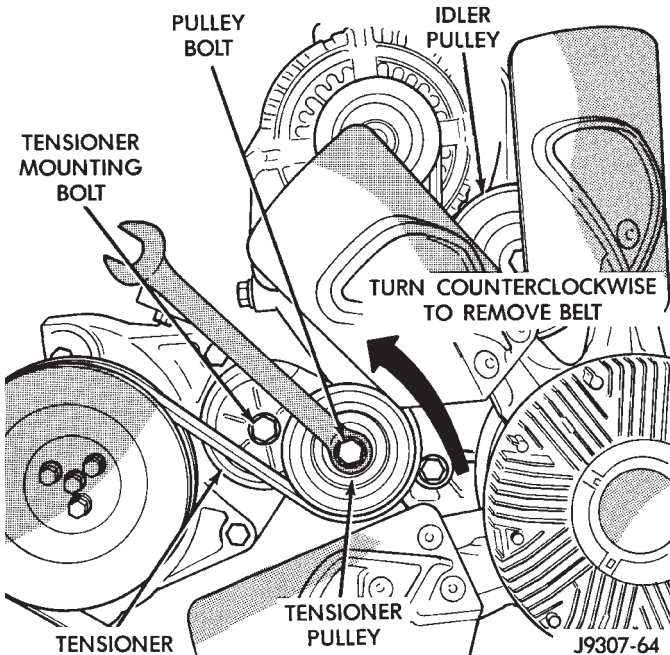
Belt Tensioner—5.9L HDC-Gas Engine
